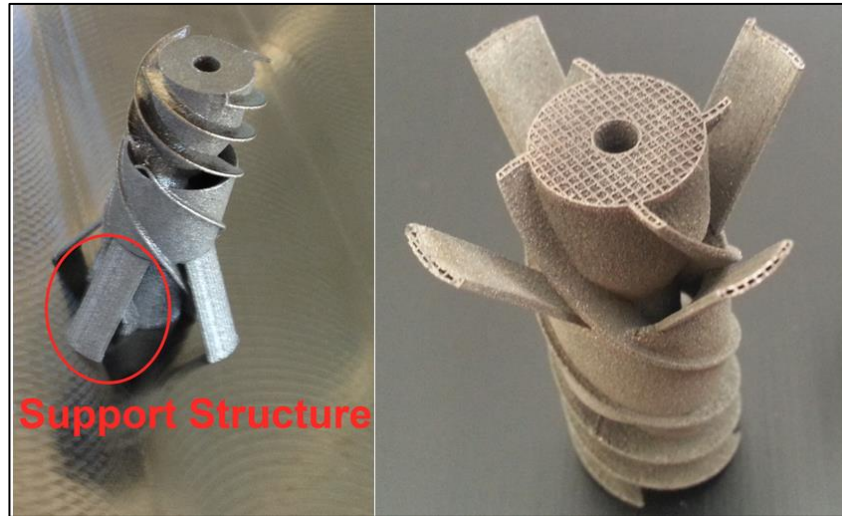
Trial particals for determining fitting tolerances
